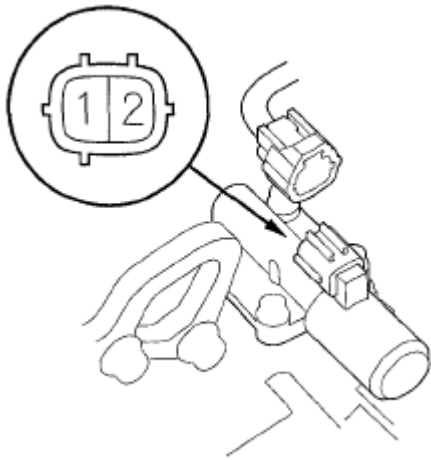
Identifying A/T Clutch Pressure Control Solenoid Valve C Connector Terminals
